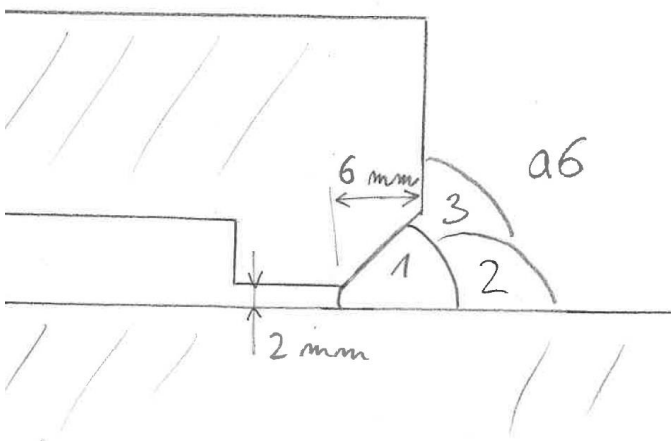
Weld bevel and corresponding schematics of weld passes layout for joining of adapters to vessel wall
